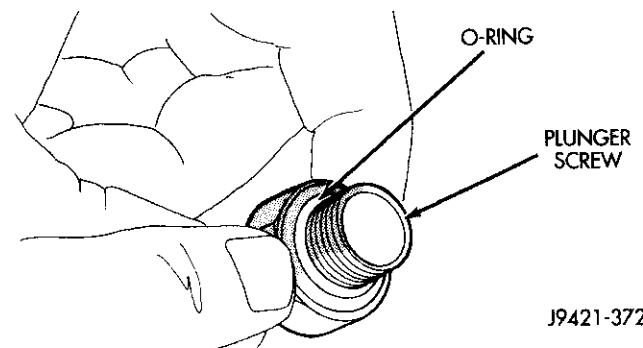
O-Ring Installation On Poppet Plunger Screw
